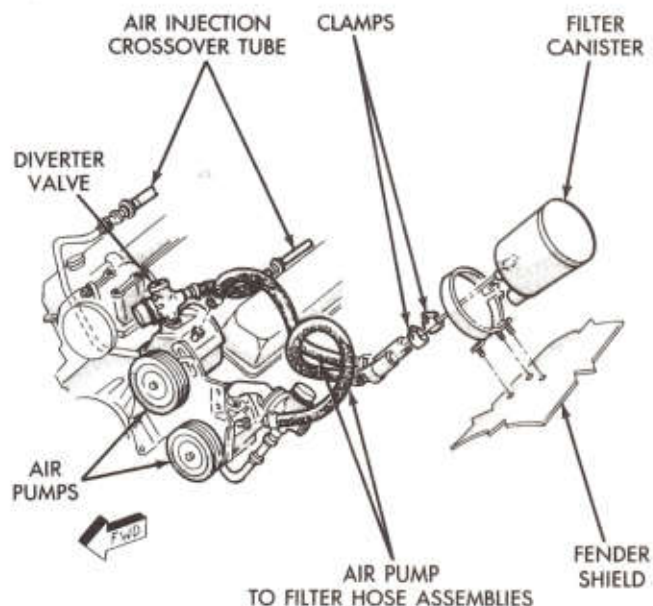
Dual Air Pump Mounting 5.9L-4 Engine
